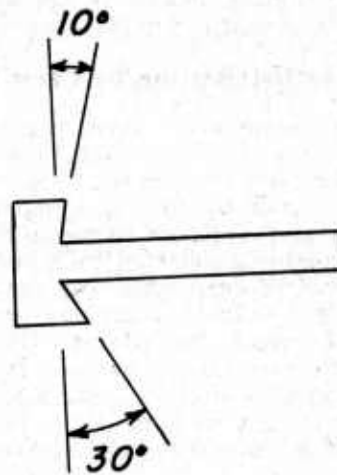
Gage for checking front and back bevel on trimmer saws.
